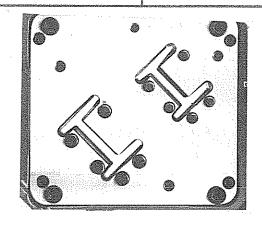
Combined sectional steel blade of PME type for I steel sections
